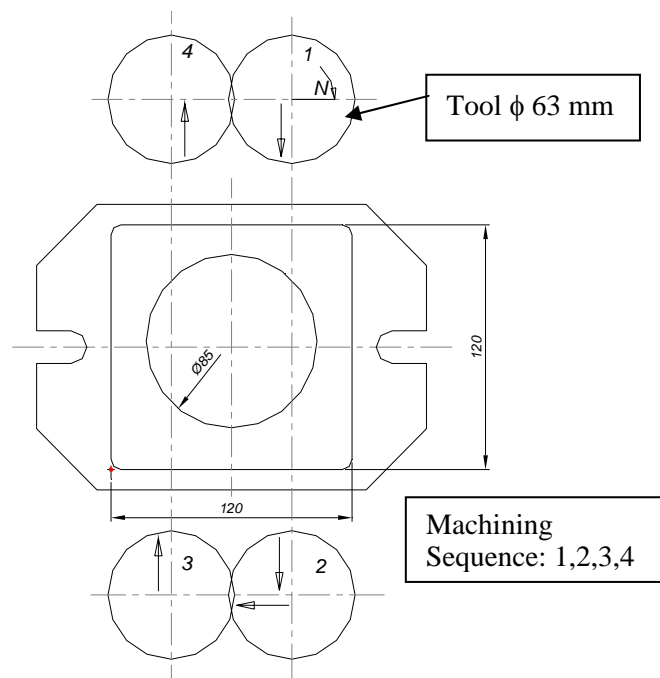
Workpiece 2 scheme and feed direction used in the experiments
